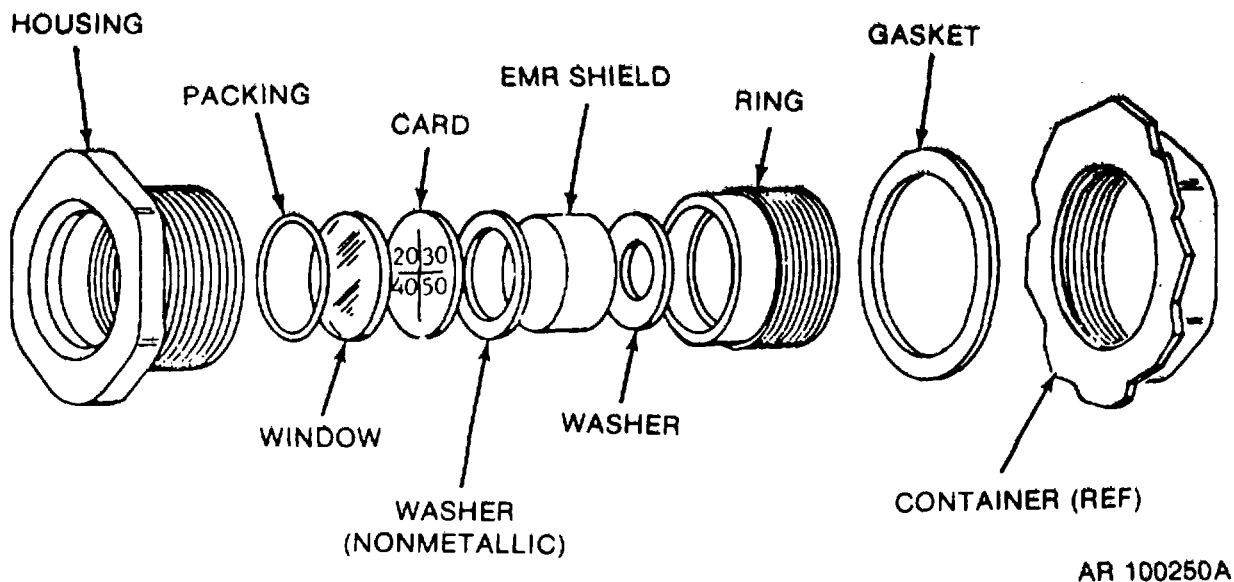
Removal/replacement of humidity indicator card/plug.
